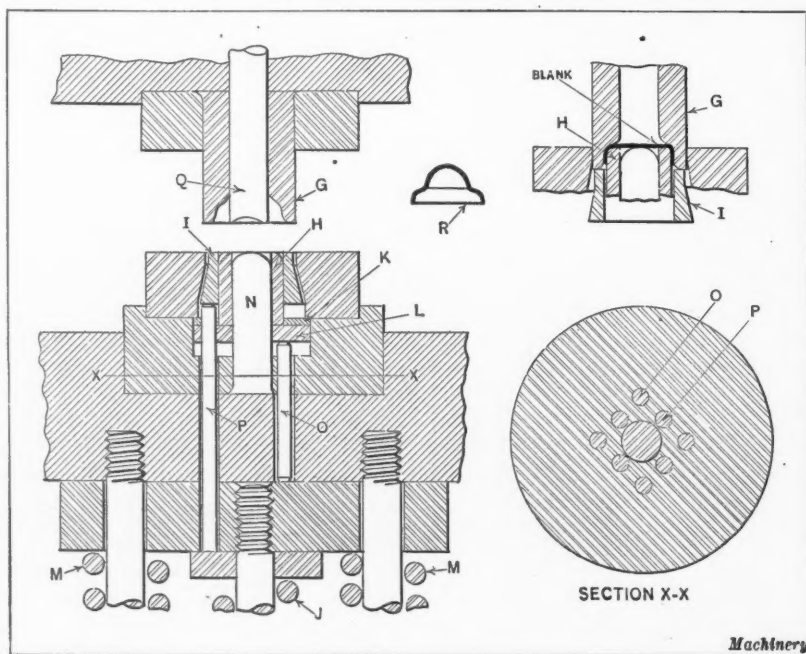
Combination Blanking and Forming Die for Part F, Fig. 1
